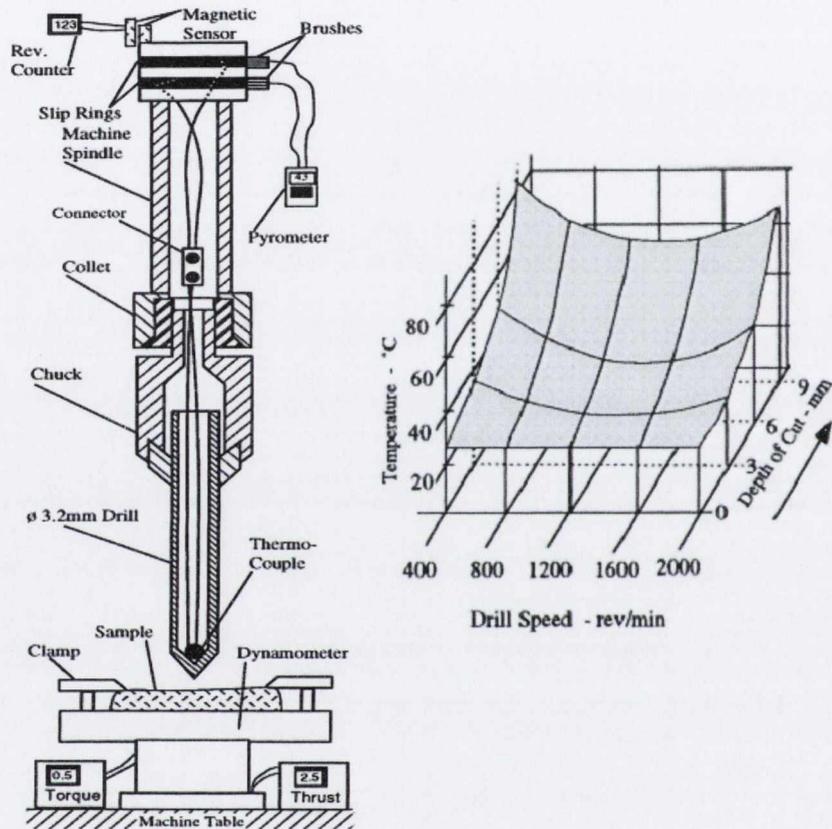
Experimental setup and results using thermocouple embedded in drill [143].
